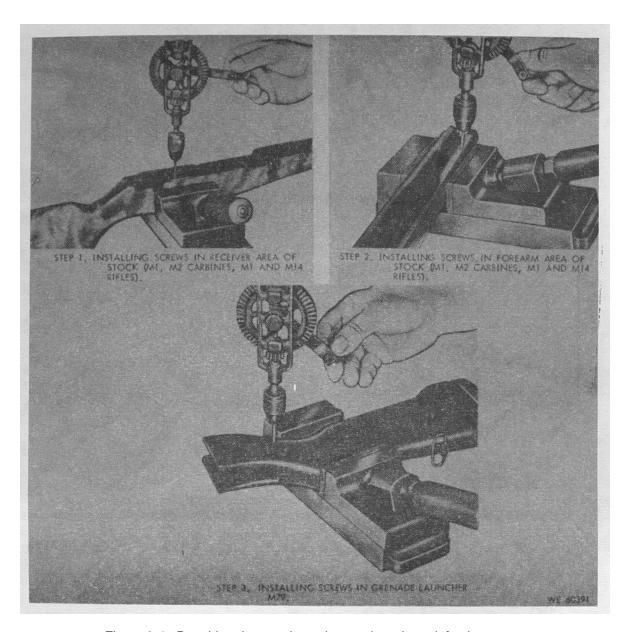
Repairing damaged wooden stocks using reinforcing screws.
